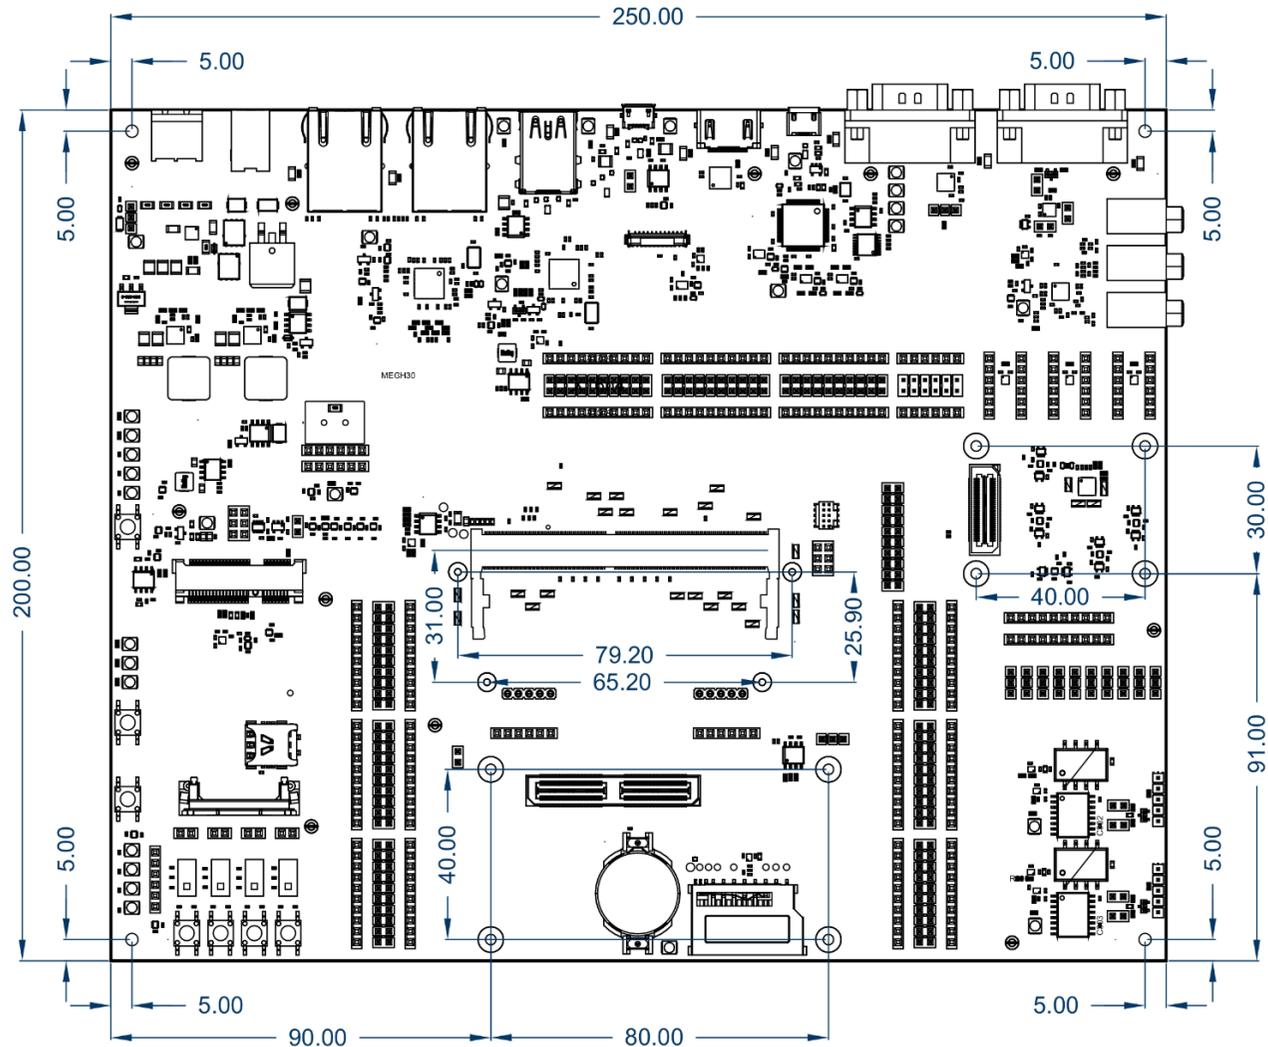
Verdin Development Board Dimensions (in millimeters) – Top Side
